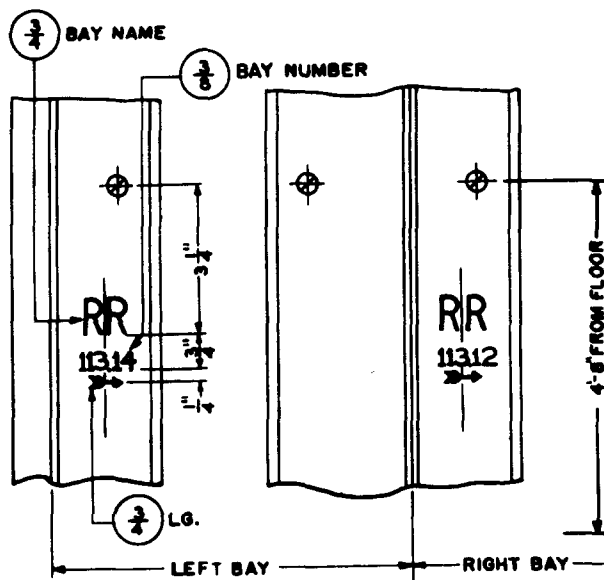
Fixed Rear Covers (When Furnished) of Left Uprights, When Facing Rear of Frame, of Both Bays of Double-bay Relay Rack - Box-type Frames
